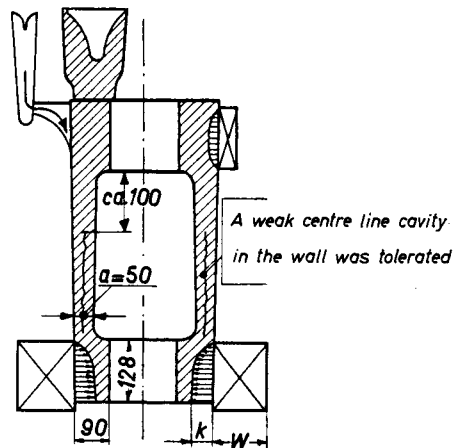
Roll, the lower shoulder of which was cooled by chills. Side feeder head with artificial end zone at the upper shoulder.
